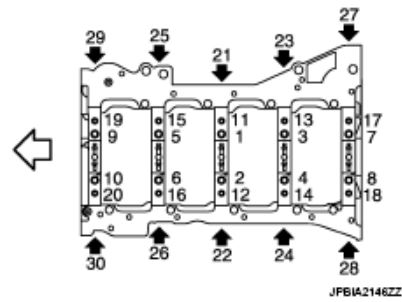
Identifying Cylinder Block Mounting Bolts Loosening Sequence
